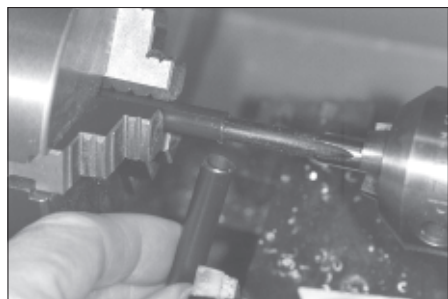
The brake line was parted in half and one end was threaded using the .275-40 tap.
